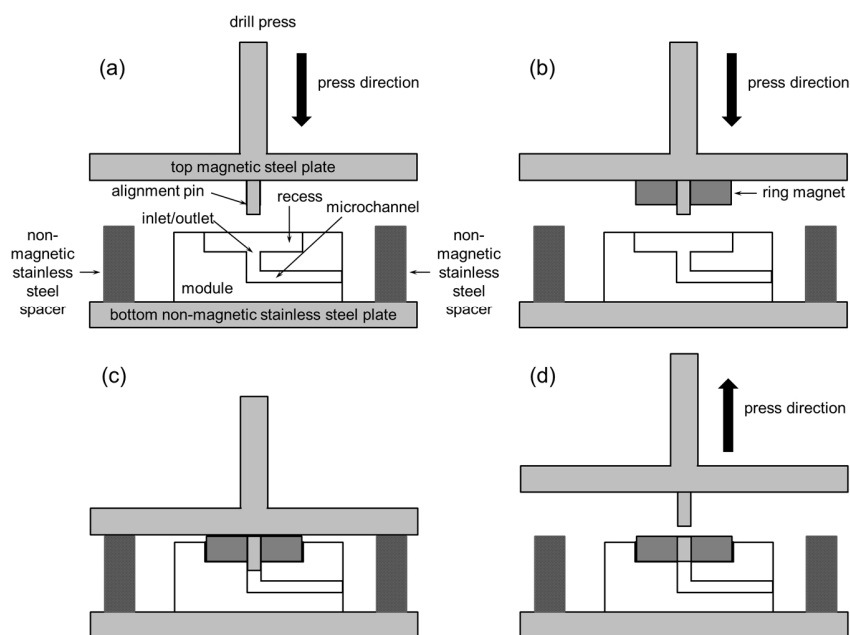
Schematics of assembling a ring magnet into the recess of a module using a drill press setup. (a) Alignment pin on the top magnetic steel plate is aligned to the inlet/outlet inside the recess of the module that is adhered on the bottom non-magnetic stainless steel plate by a double-sided pressure sensitive adhesive tape. (b) Ring magnet with a biocompatible silicone adhesive added to its circular side wall is magnetically attached to the top magnetic steel plate with the alignment pin inserted through the inner hole of the ring magnet. (c) Ring magnet is press-fitted into the recess of the module. (d) The top magnetic steel plate is retracted to its original position after the ring magnet is press-fitted into the recess of the module.
